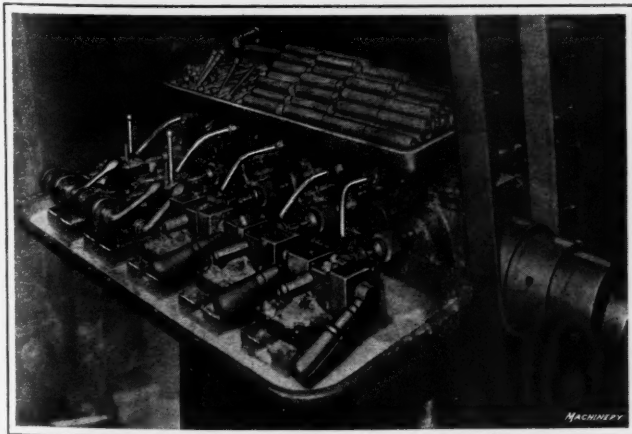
Five-spindle Semi-automatic Drilling Machine built by Detroit Tool Co. Machine is shown in Operation in Willys-Overland Plant
